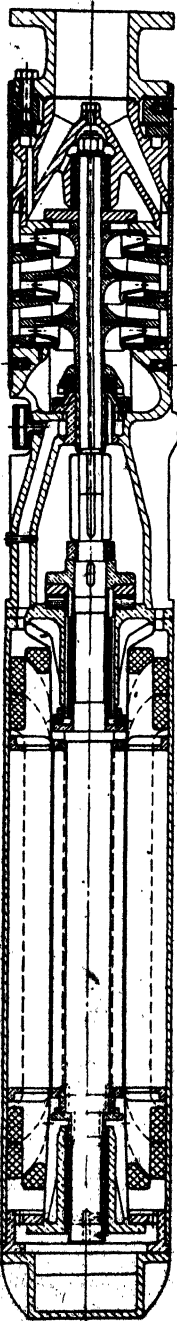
Sectional pump and motor in which all bearing surfaces are superfinished.
